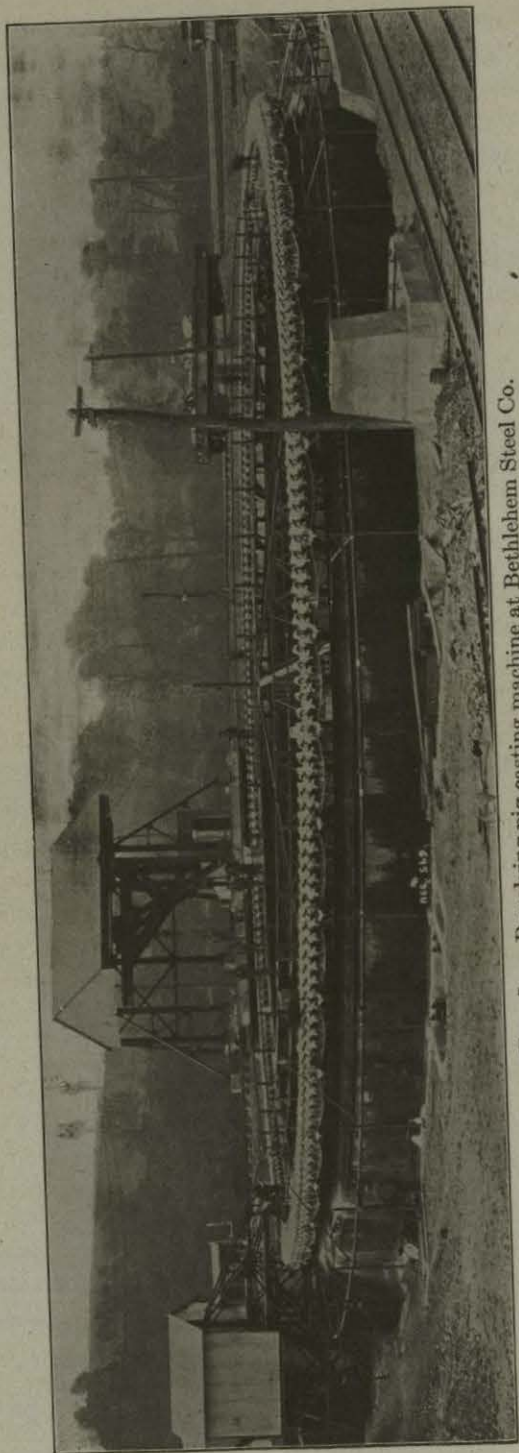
Revolving pig casting machine at Bethlehem Steel Co.
